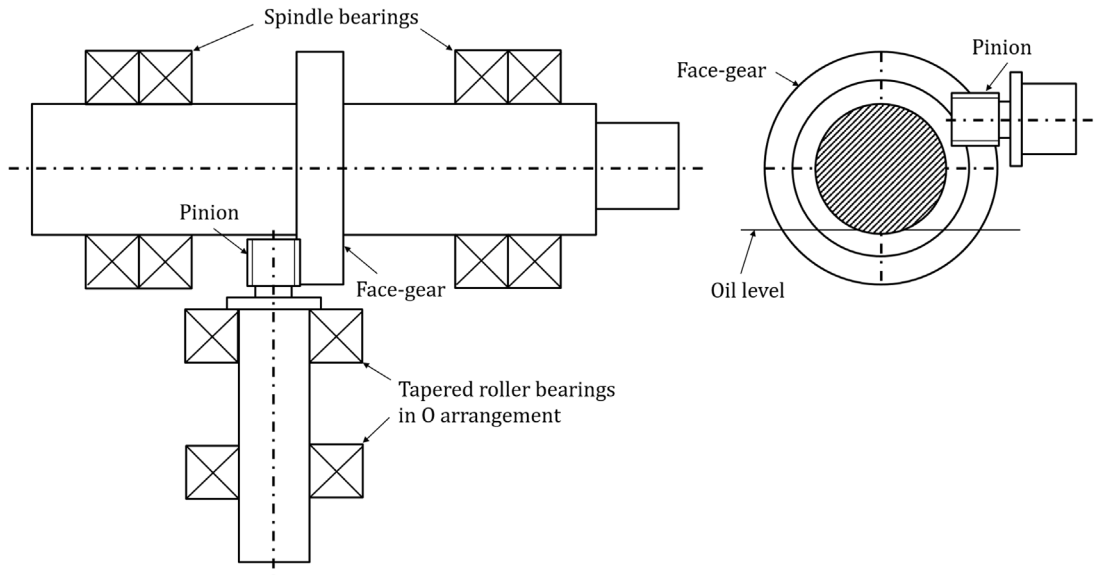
Schematic structure of the transmission: (left) Top view; (right) Side view in the direction of the face-gear shaft.
